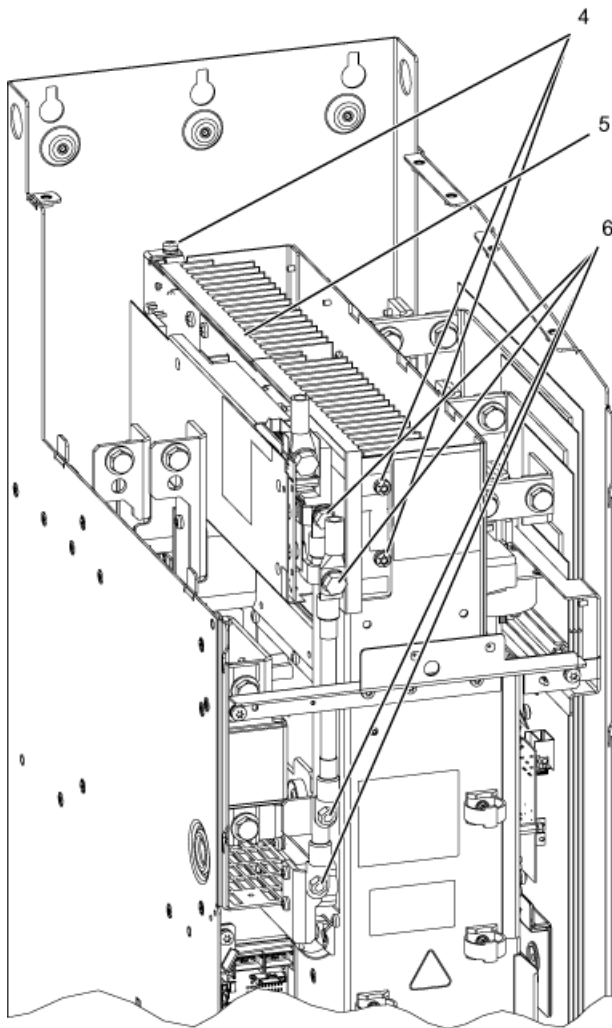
Installing the Braking Module in a Power Module frame size GX – steps 4 - 6
